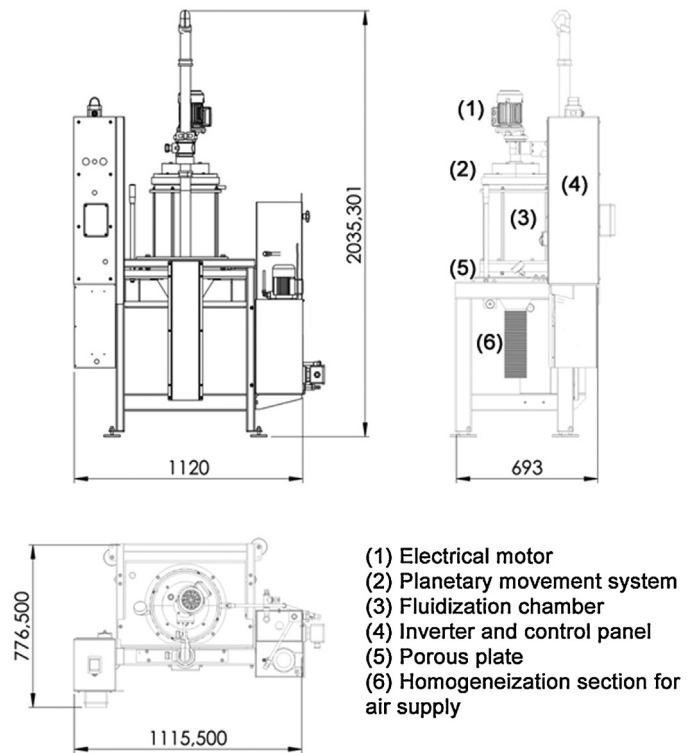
Design of the fluidized bed assisted drag finishing (all the dimension are given in mm).
